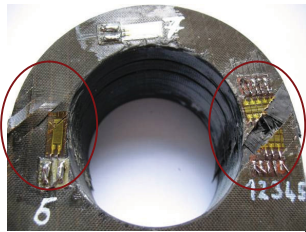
Lateral tension failure at smallest net section of QI-specimen
